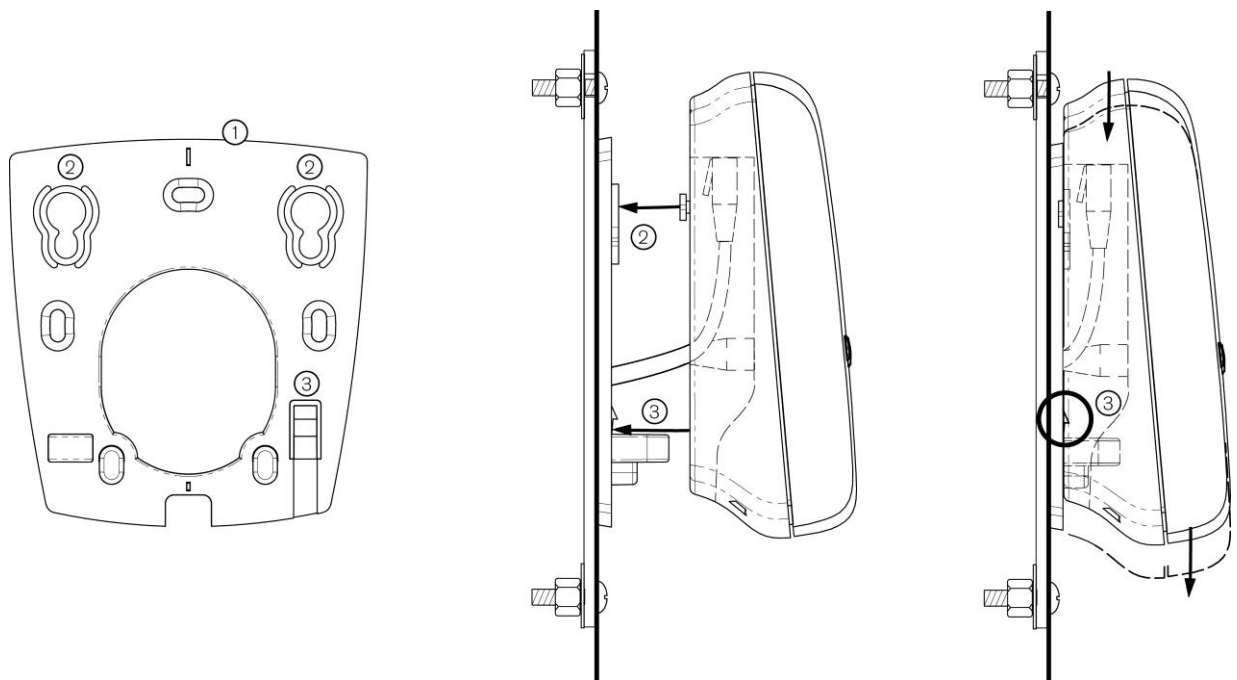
Installation of the plastic mounting plate for vending machines without standard EVA cutouts
